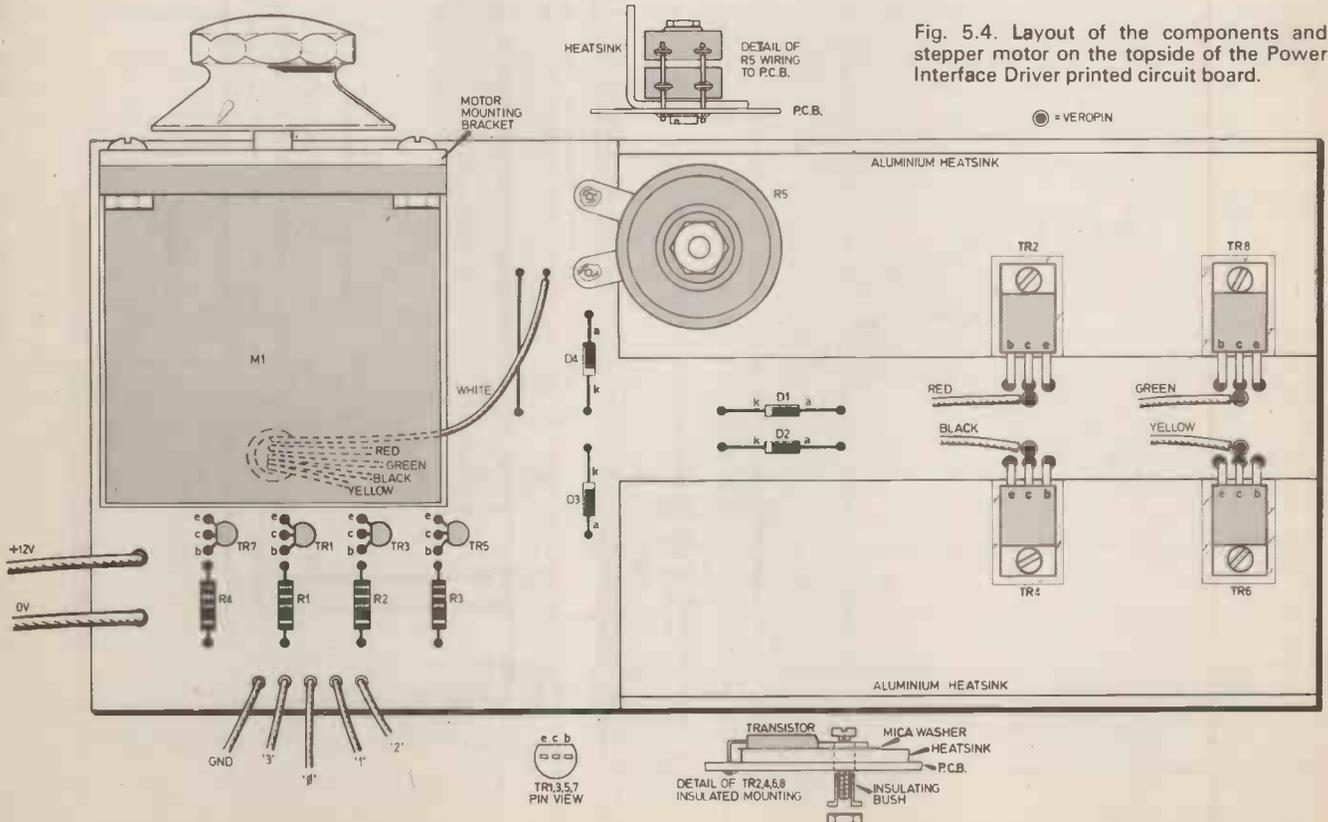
Layout of the components and stepper motor on the topside of the Power Interface Driver printed circuit board.
